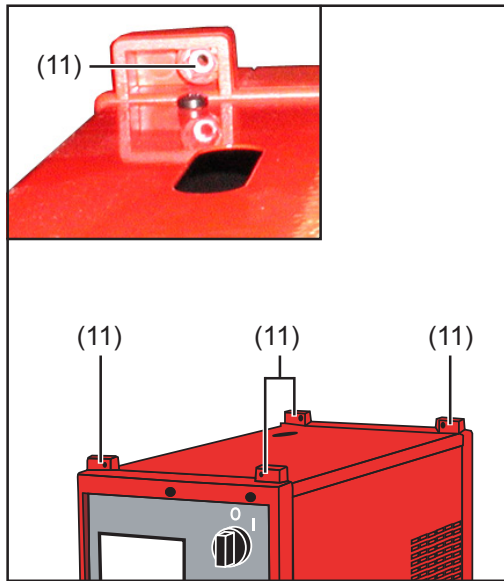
Fixing bars on the top of the autotransformer or cooling unit
